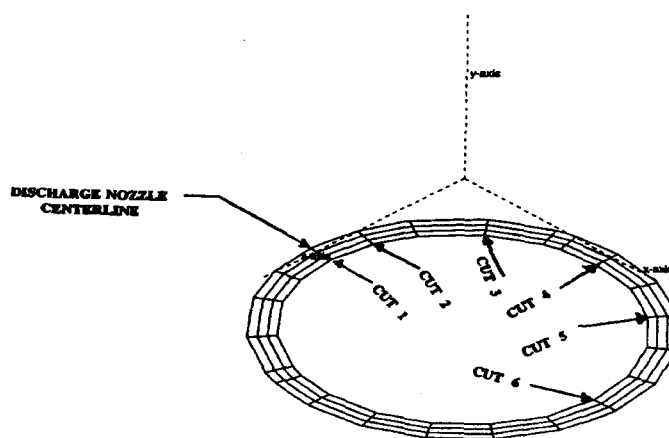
Location of Cut 1 in the Weld Region of RCP Casing
